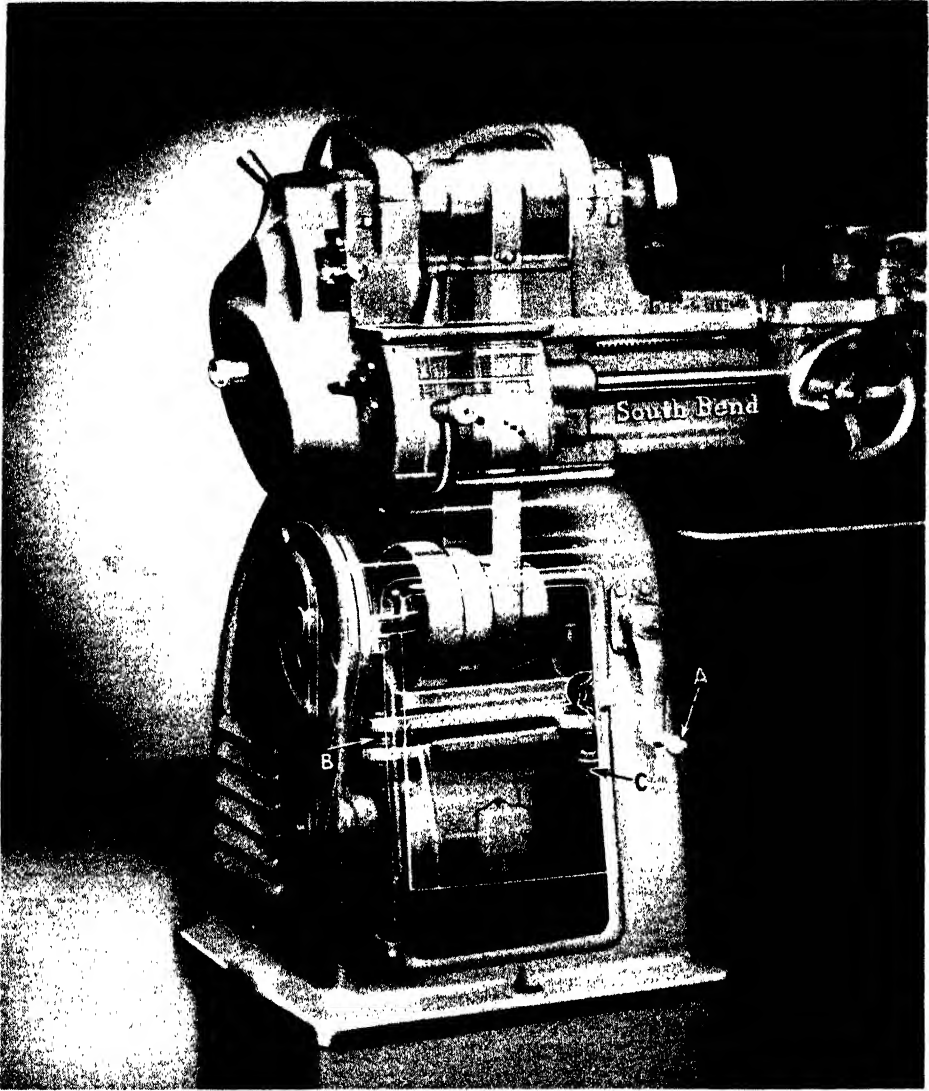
B. SOUTH BEND LATHE DRIVE. (Courtesy, South Bend Lathe Works.)
